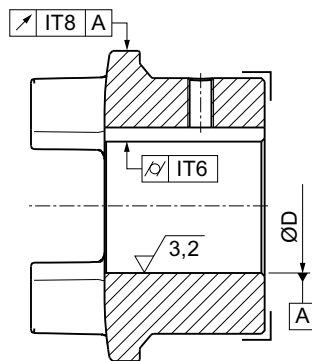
Tolerances for the finished bore in coupling part 1/2 (1 or 2)
